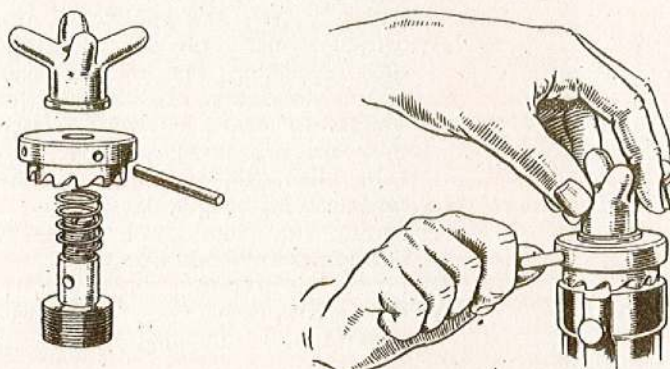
Use of special cutters O.T. 130250 and O.T. 130251 for truing casting faces
